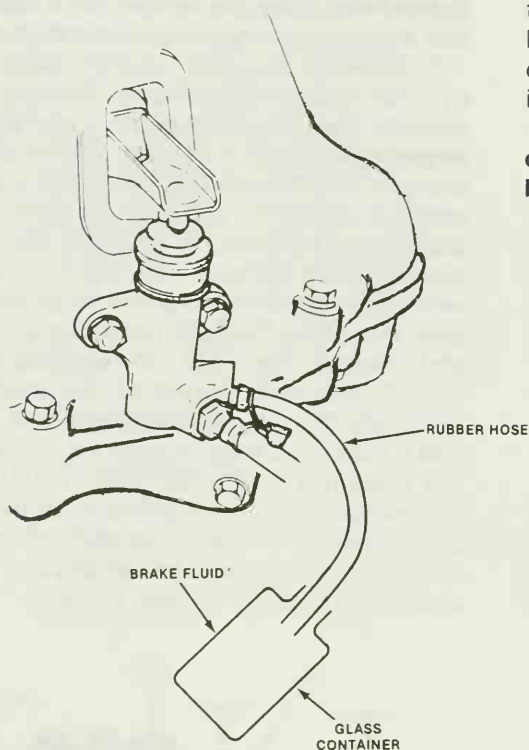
Bleeding removes air from a hydraulic clutch.
